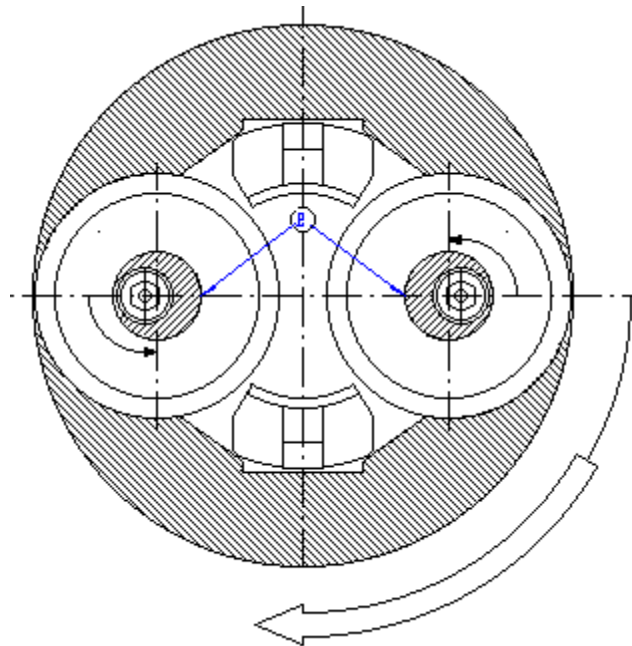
SZLH508 Pellet Mill pressure roller conditioning
